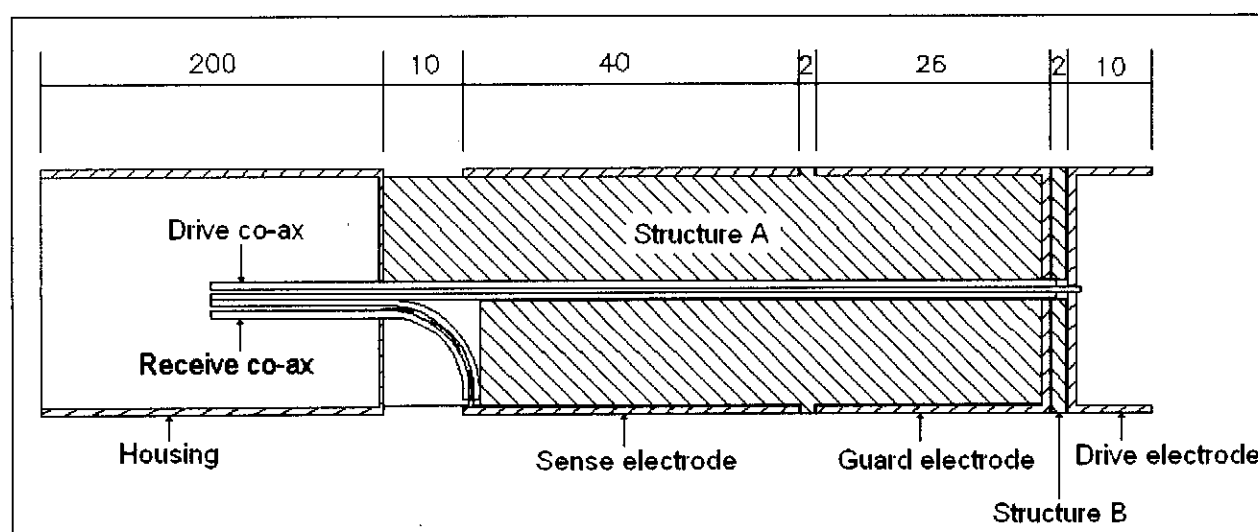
Sectional cut through probe to describe mechanical assembly
